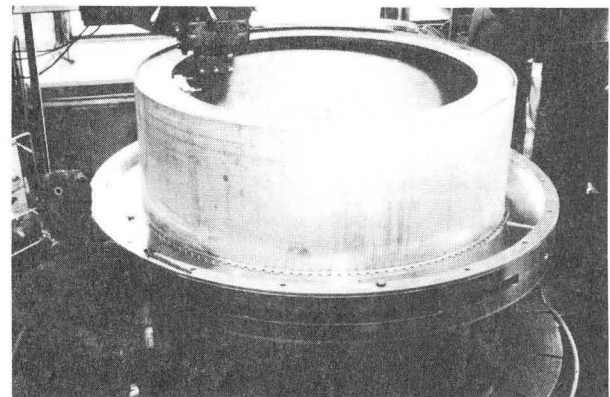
LHe vessel central plate and welded inner shell
